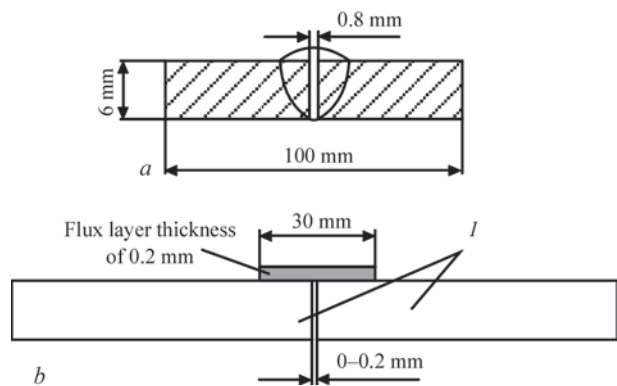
Schematic of sample assembly for welding: *a* — TIG welding with through penetration; *b* — TIG welding over a layer of flux
